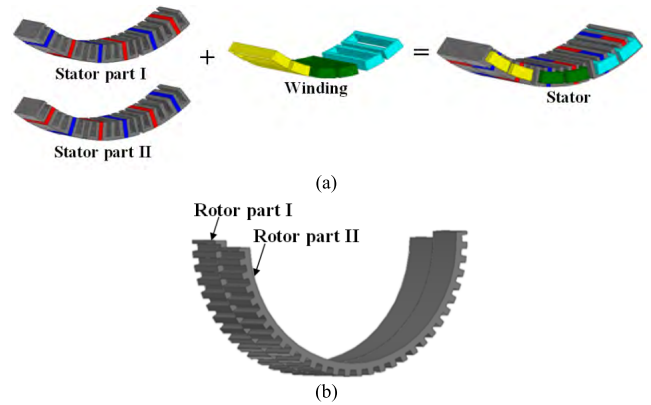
Establishment of stator and rotor (a). Stator part. (b) Rotor part.
